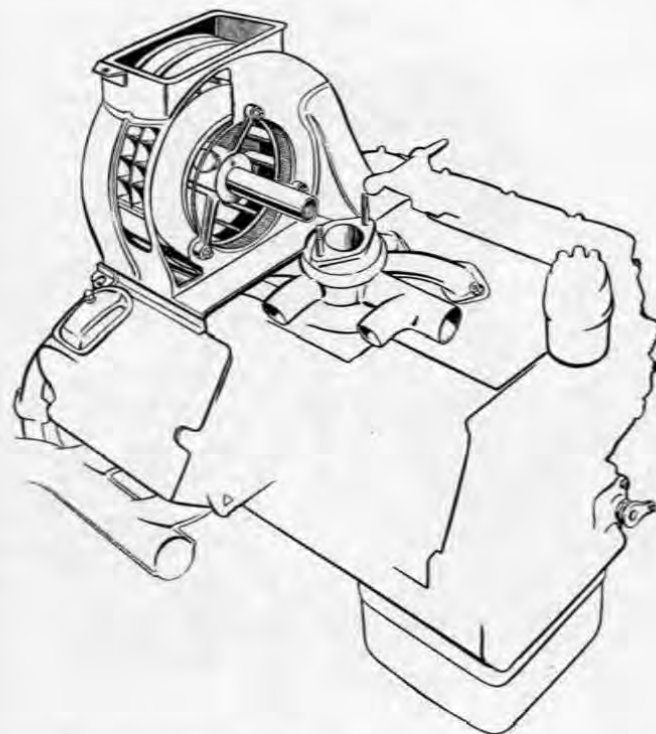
Arrangement of the radial fan of the air-cooled Steyer engine.
